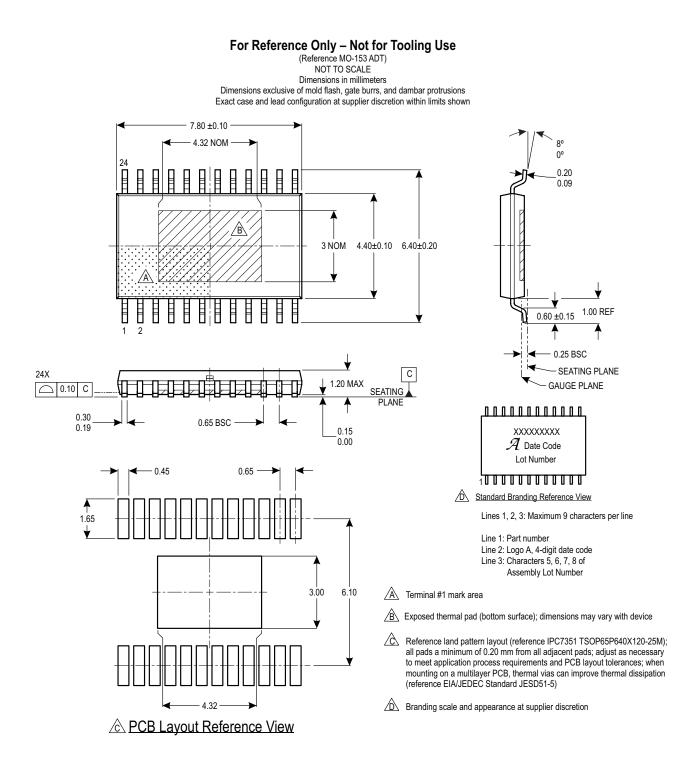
Package LP, 24-Lead TSSOP with Exposed Pad
